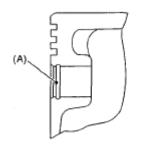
Checking Piston Pin Courtesy of SUBARU OF AMERICA, INC.
